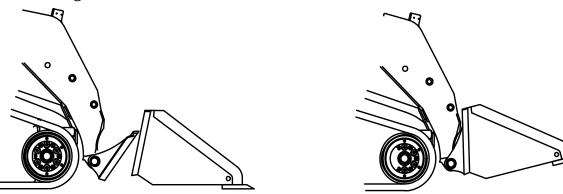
Quick Attach Mechanism Locked to Attachment
